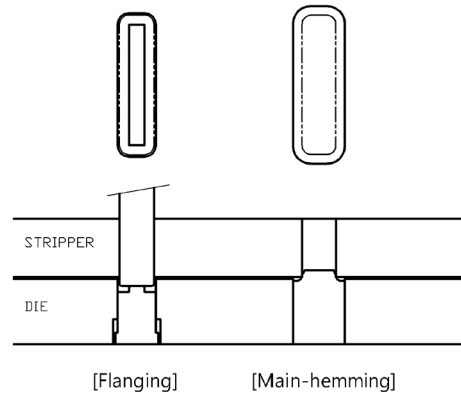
Punch shape and die stripper at 2 steps hemming with shape
